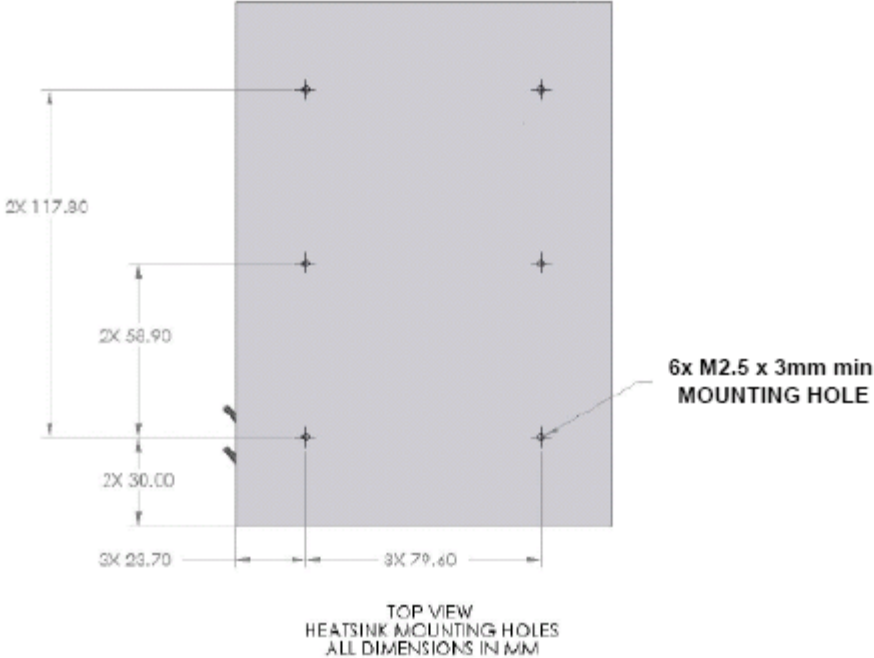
MSA-100GLH Flattop mechanical dimensions - top view
